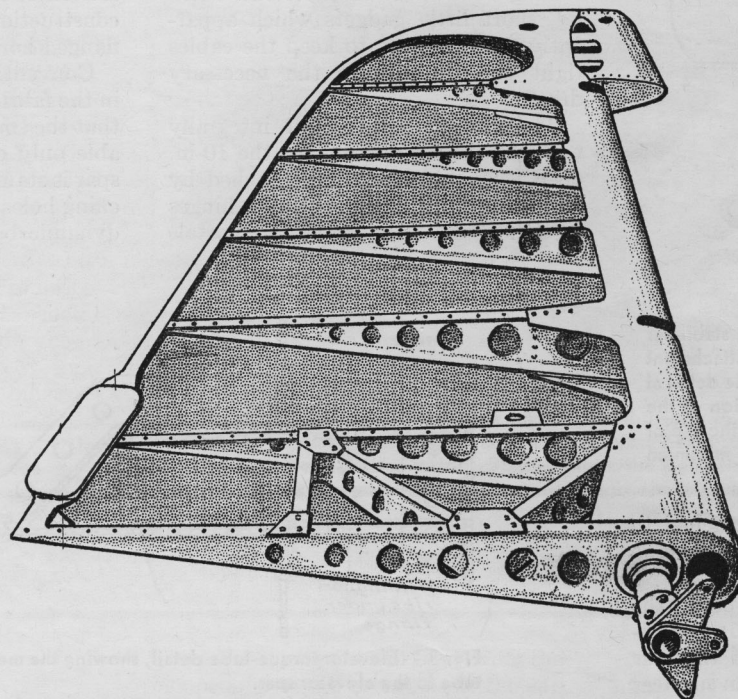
Rudder with one side of the fabric covering removed to show rib construction. The control horn, with 5-in. spread, is welded to the torque tube. The trim tab set in the T.E. is adjustable only on the ground.
